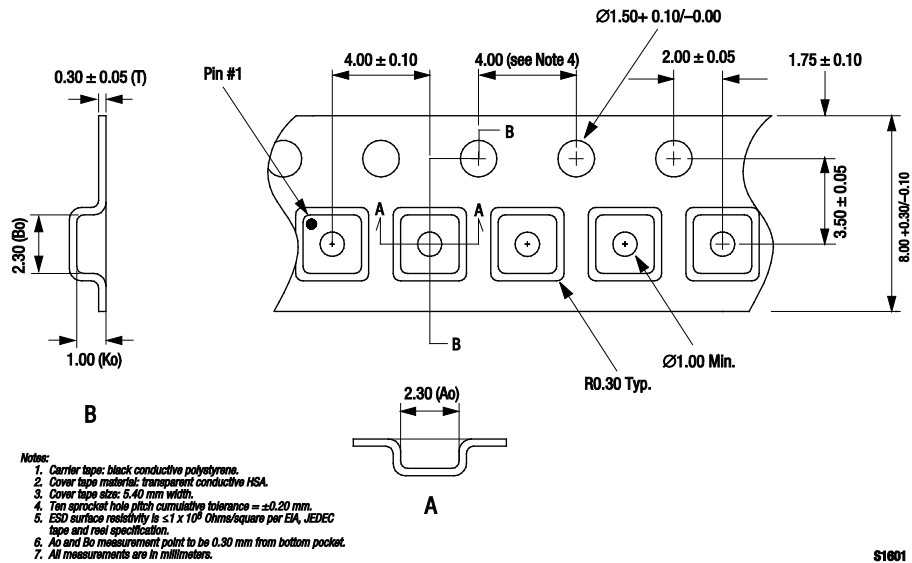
CLA4609-086LF Tape and Reel Dimensions
